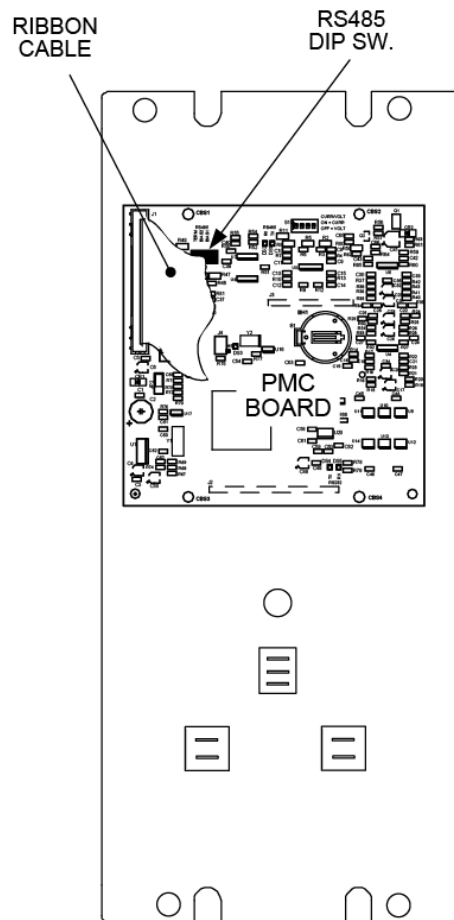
Location of RS-485 DIP Switch on C-More PMC PCB
